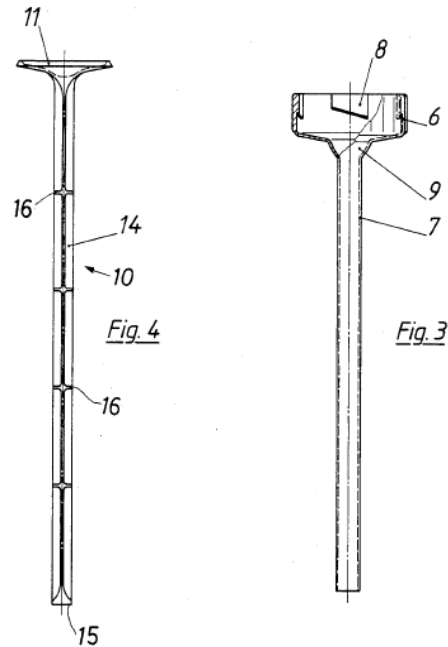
illustrates a part cross-sectional view of nozzle element 6, and Figure 4 illustrates a side view of ram 10. Ex. 1005, 2:41–45, 3:3–5, 19–21. Müller discloses that “[t]he ram is movably mounted in the nozzle tube to eject bone cement therefrom.” *Id.* at 1:54–55. Petitioner contends that “[t]he ram, shown in figure 4, is an auxiliary tool for urging filling material from the nozzle, just as claimed in the ‘307 patent.” Pet. 32.
